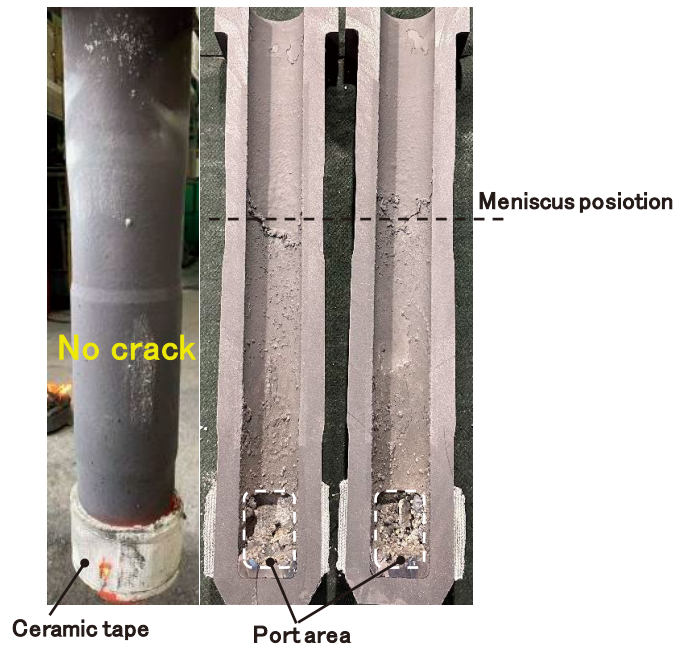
Outer appearance / left and cross section view / right of nozzle after molten pig iron pouring test.
